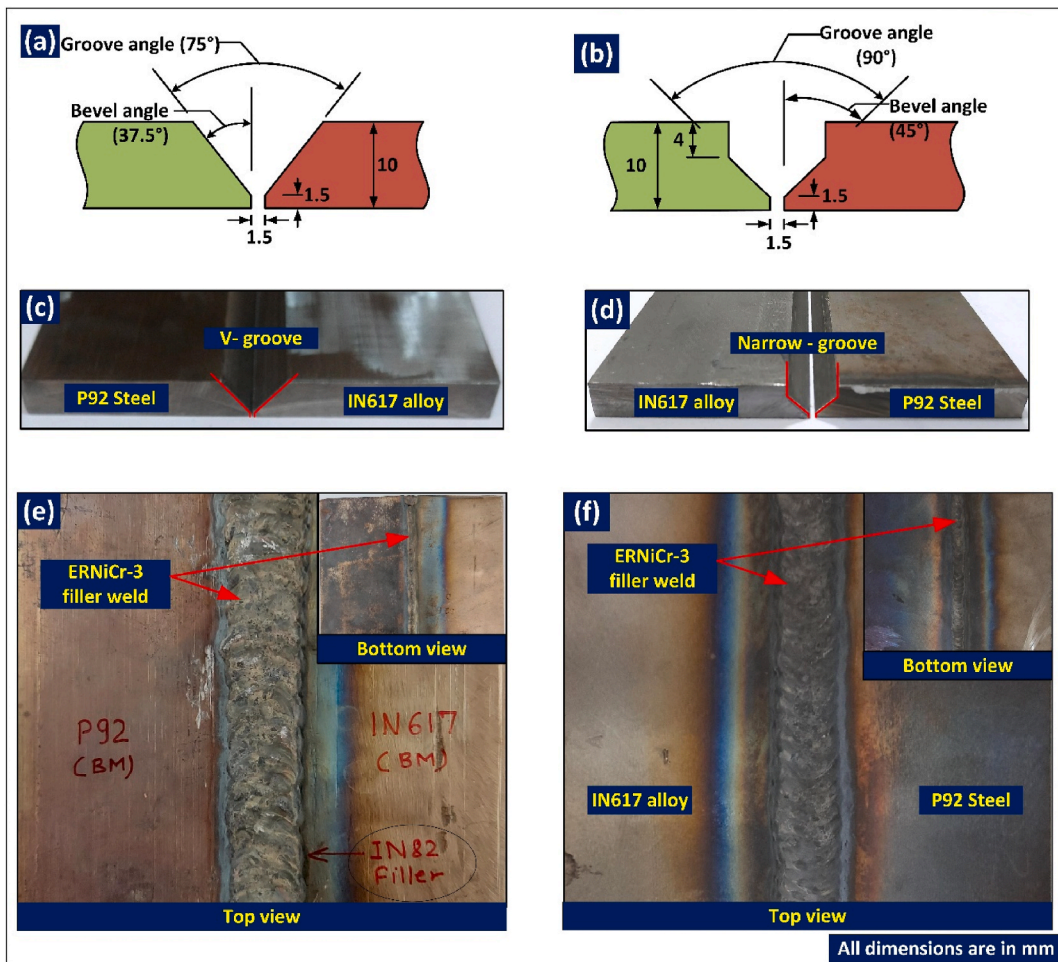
Groove details: (a) conventional VG (b) NVG; (c, and d); (e and f) welded plate front and back view.
